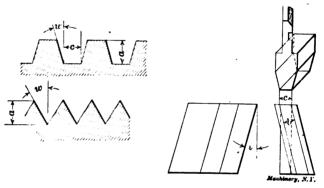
Diagram Illustrating the Planing of Thread Tools.
